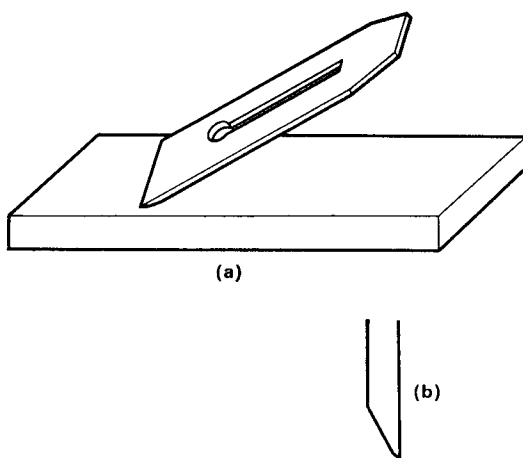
(a) The plane iron being sharpened on an oilstone until a burr is produced. (b) An enlargement of the burr.
